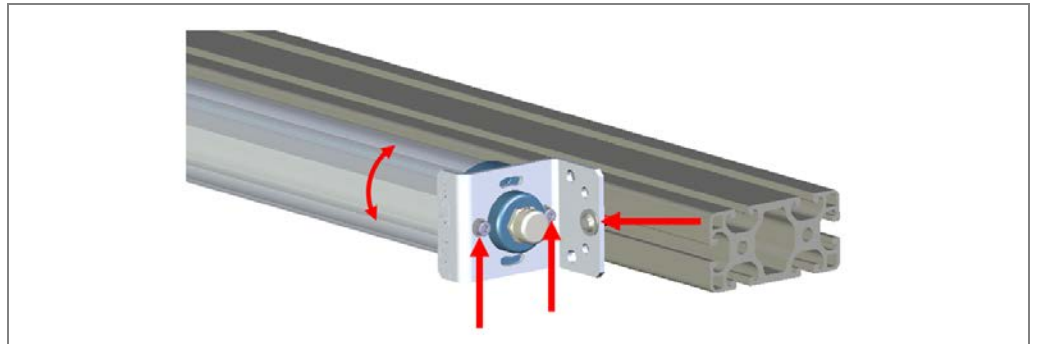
IPG2: aligning the protective pipe and fixing the position
